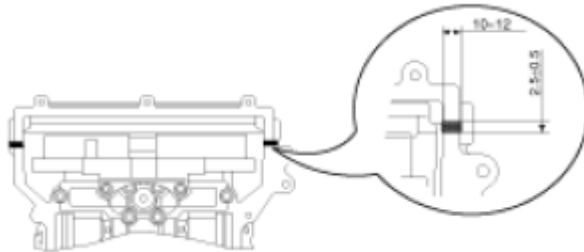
Identifying Gap Dimension Between Cylinder Head And Timing Chain Upper Case
